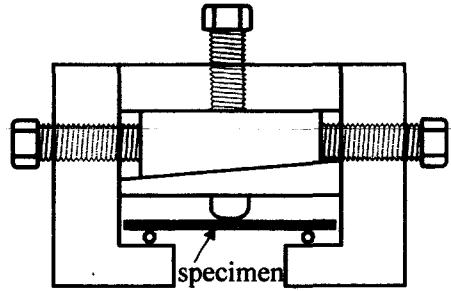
Modified 3 point bending type crack testing jig
